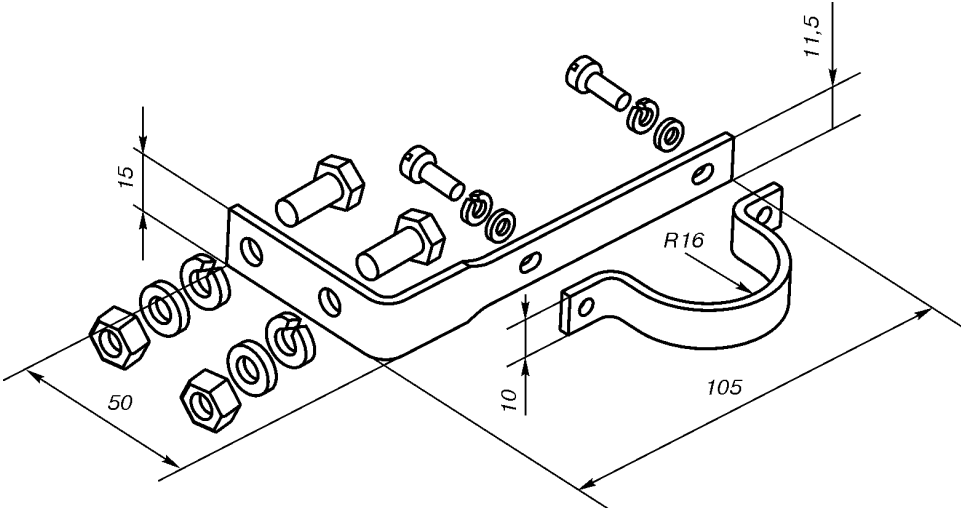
Transmitter's bracket for mounting on wall or mounting support.
